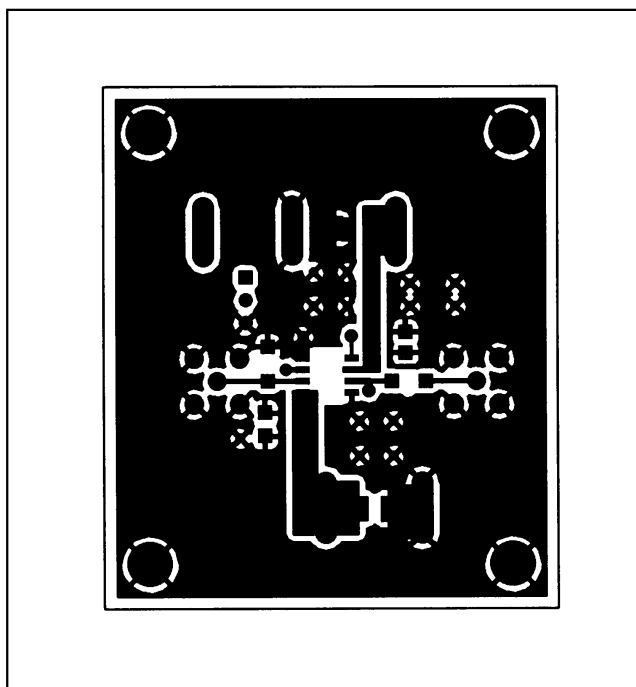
MAX4278 EV Kit PC Board Layout—Component Side
